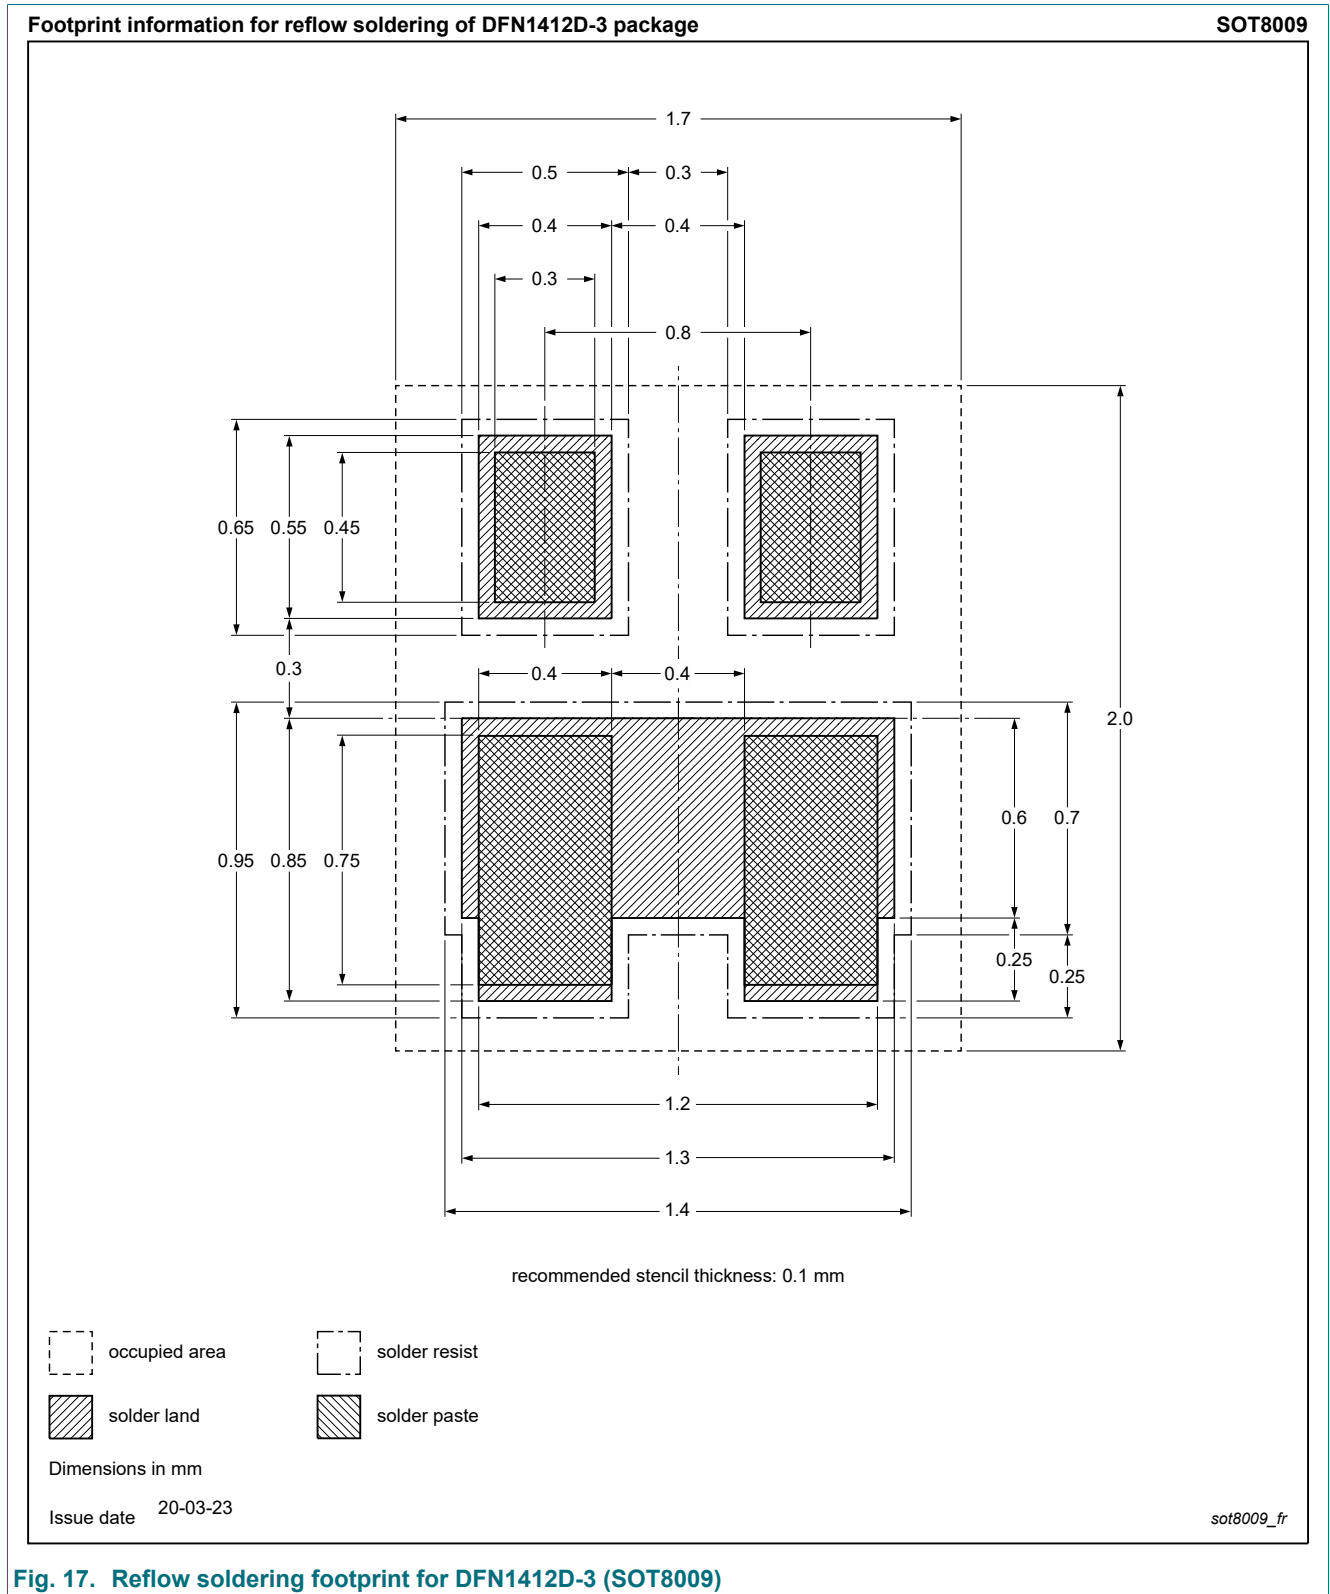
Reflow soldering footprint for DFN1412D-3 (SOT8009)
